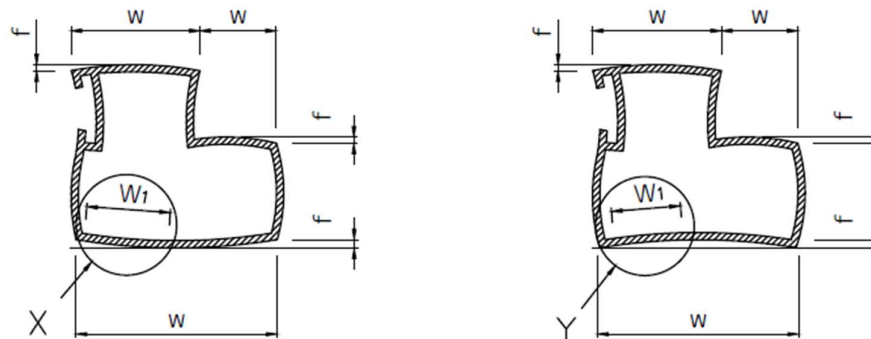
Definition of cross-sectional dimensions in EN 755-9 [30].
